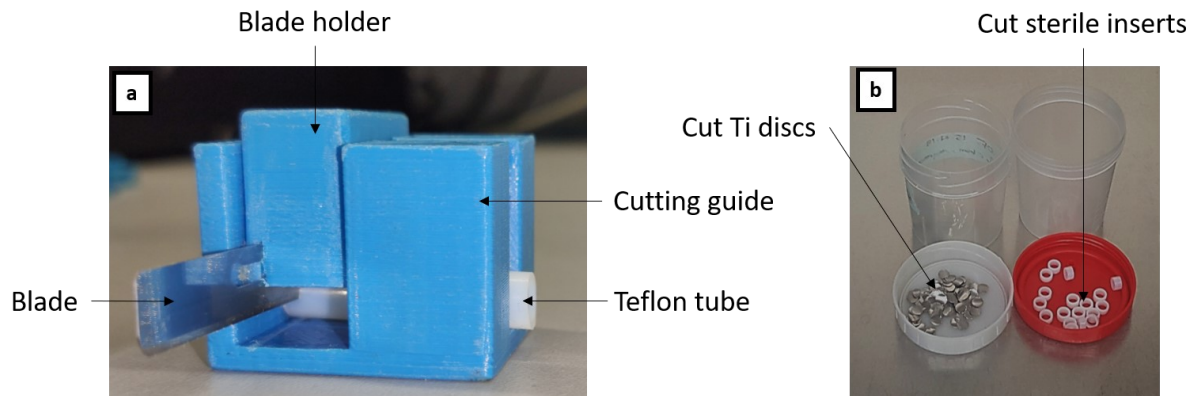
Photographs of the cutting guide, Ti discs and inserts. (a.) Photograph of the 3-D printed cutting guide used to cut the Teflon into equal-sized inserts. (b.) Photograph showing the Ti discs and Teflon inserts cut to size.
